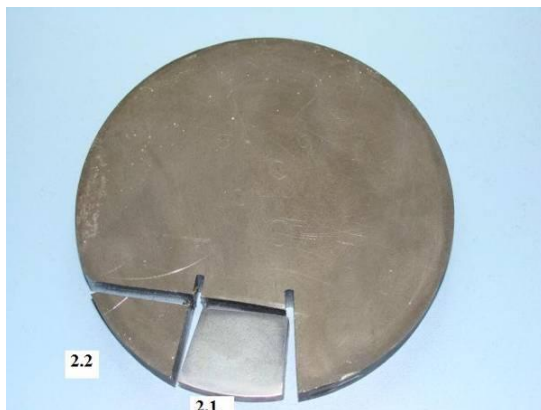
Transversal cutting disc from shaft near the surface rupture.
